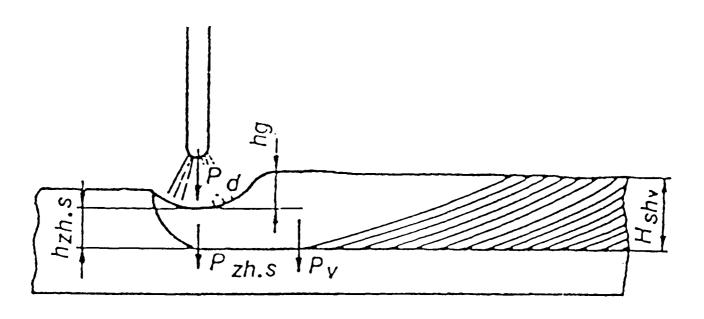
Pressure Acting in a Weld Pool³⁷
